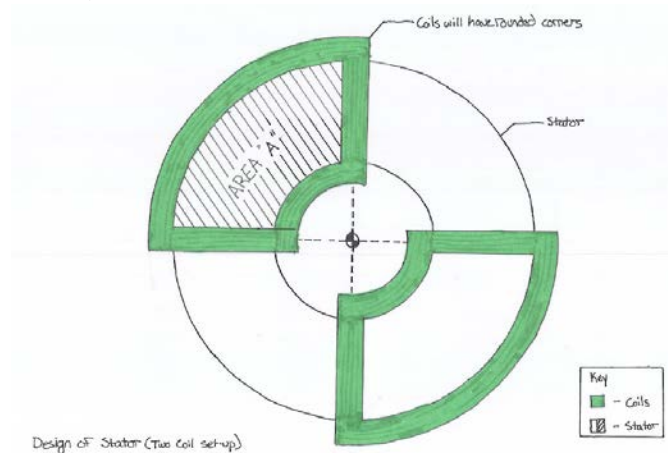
Design Concept Sketch of half the Stator with 2 Coils shown (pictured from the view of the rotor)
